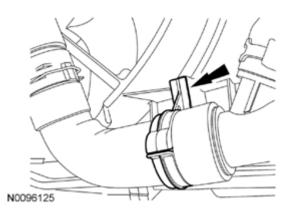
Locating Lower Radiator Hose Pin-Type Retainer Of Cooling Fan Shroud Courtesy of FORD MOTOR CO.
